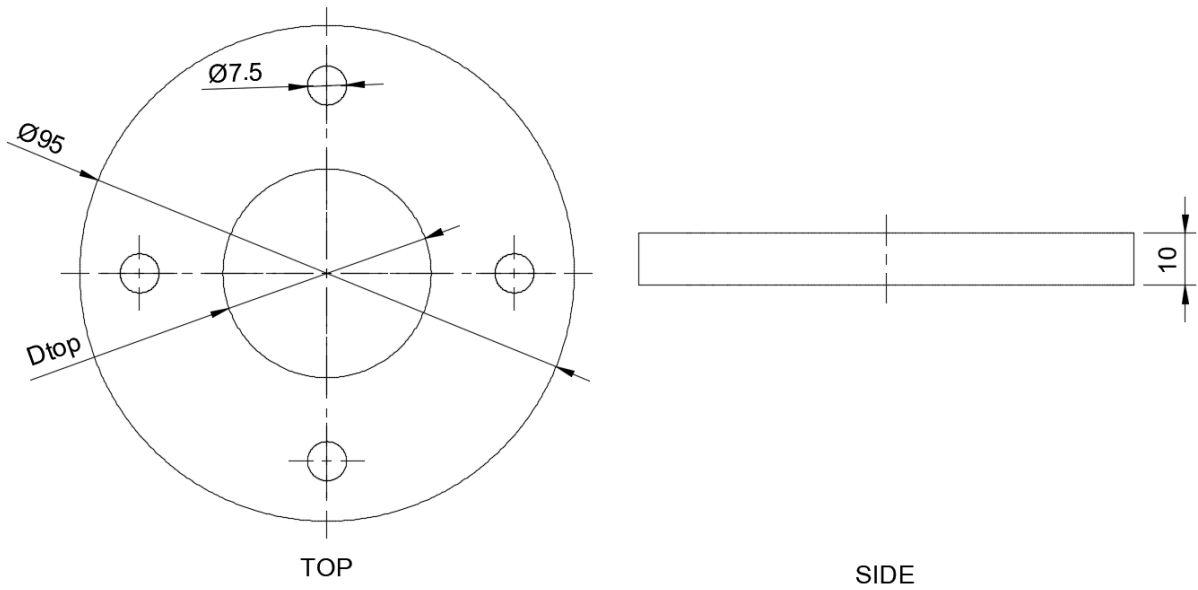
Drawing, with dimensions, of the top plate of the 3D-printed jig. All dimensions are in millimeters.
